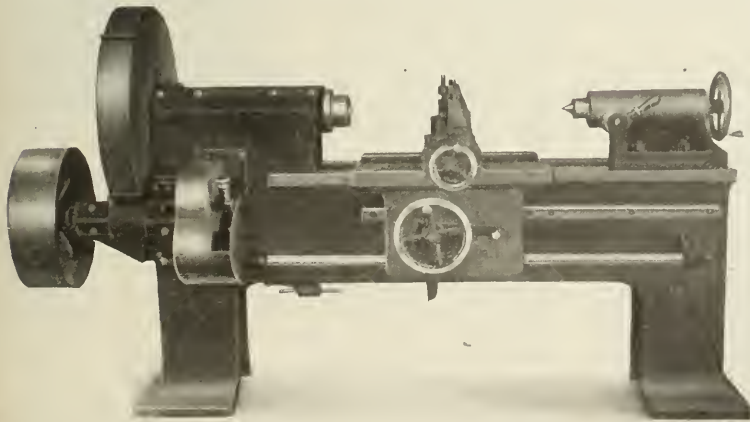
Pottstown 17-inch Lathe for machining 6-inch Shells
